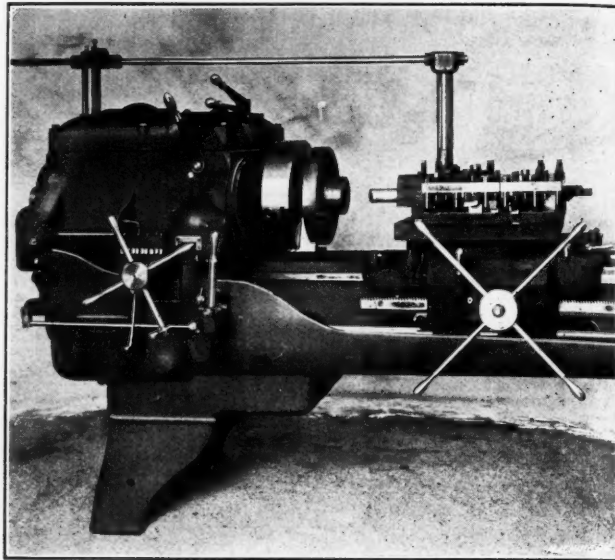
Double-spindle Machine equipped with 17-inch Chuck for Single-spindle Operation
